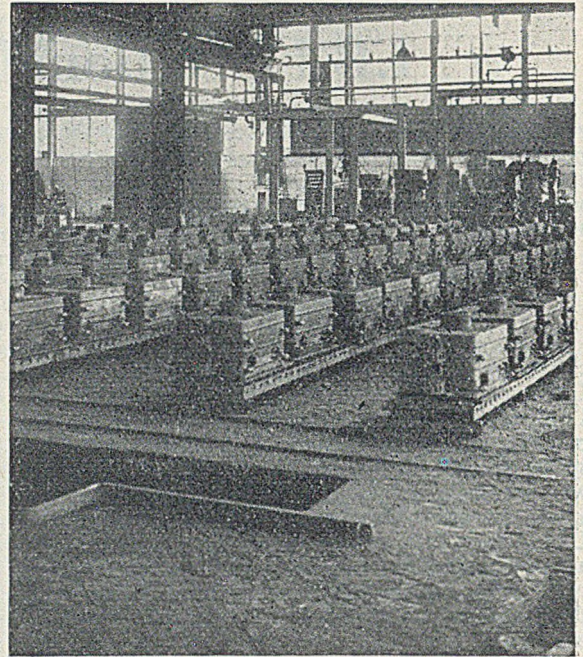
View in the General Foundry of Ley's Malleable Castings Company, Limited, showing the System of Assembling Moulds on Roller Conveyors ready for Pouring.
